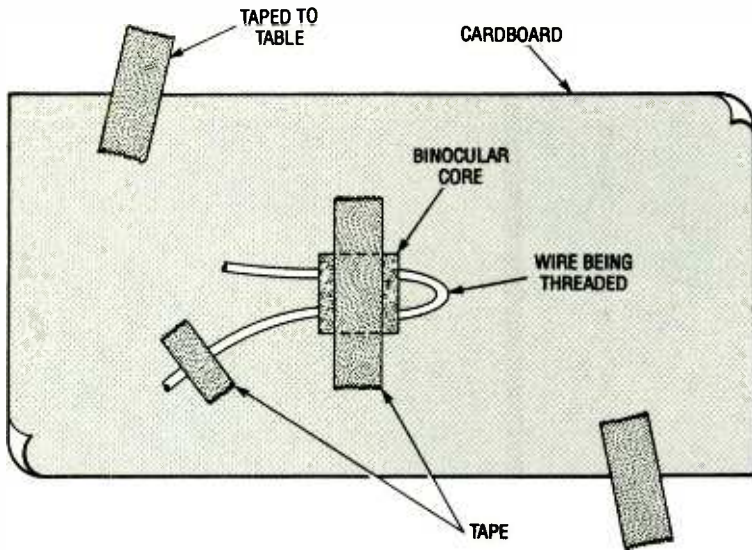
For this method of winding binocular transformers a piece of cardboard is needed to secure the core.
